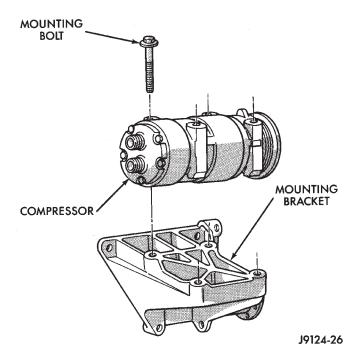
Compressor and Mounting Bracket (LH Drive Vehicles)
